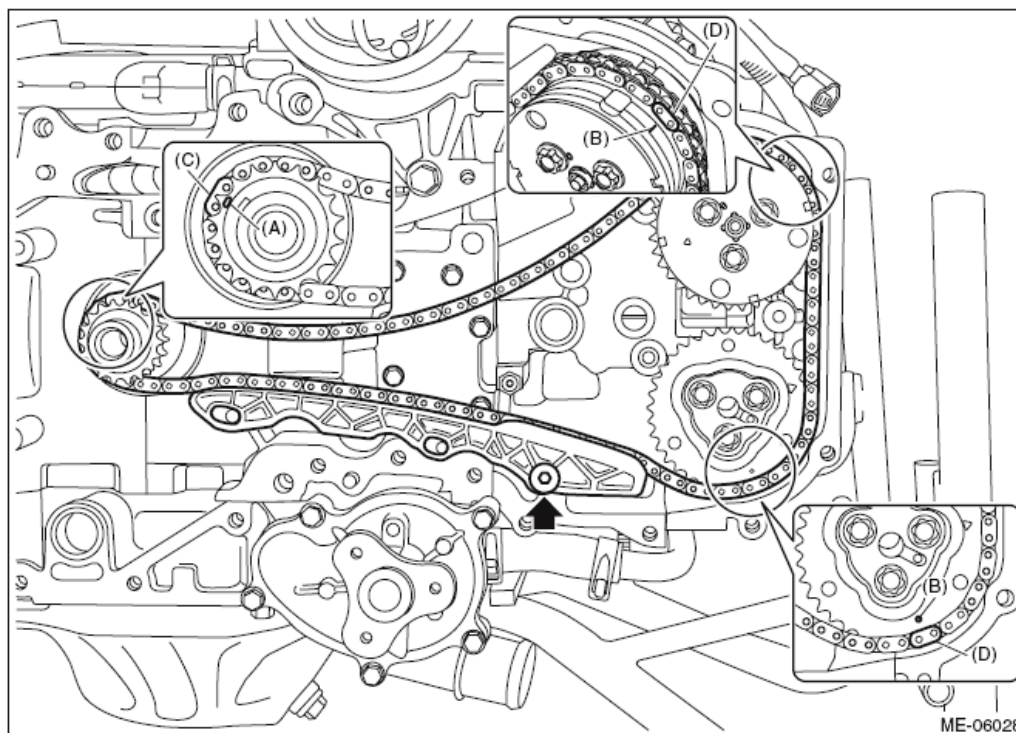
Locating Alignment Mark Of Exhaust Cam Sprocket
